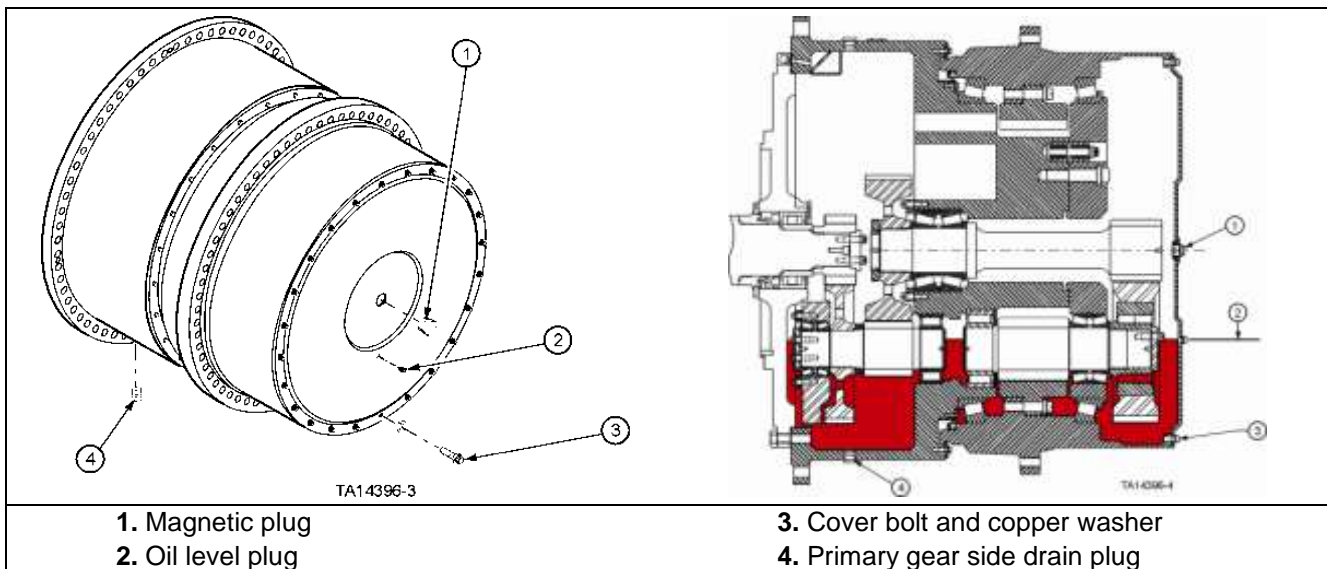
Oil servicing points and oil level - 51A2 planetary drive current production machines
